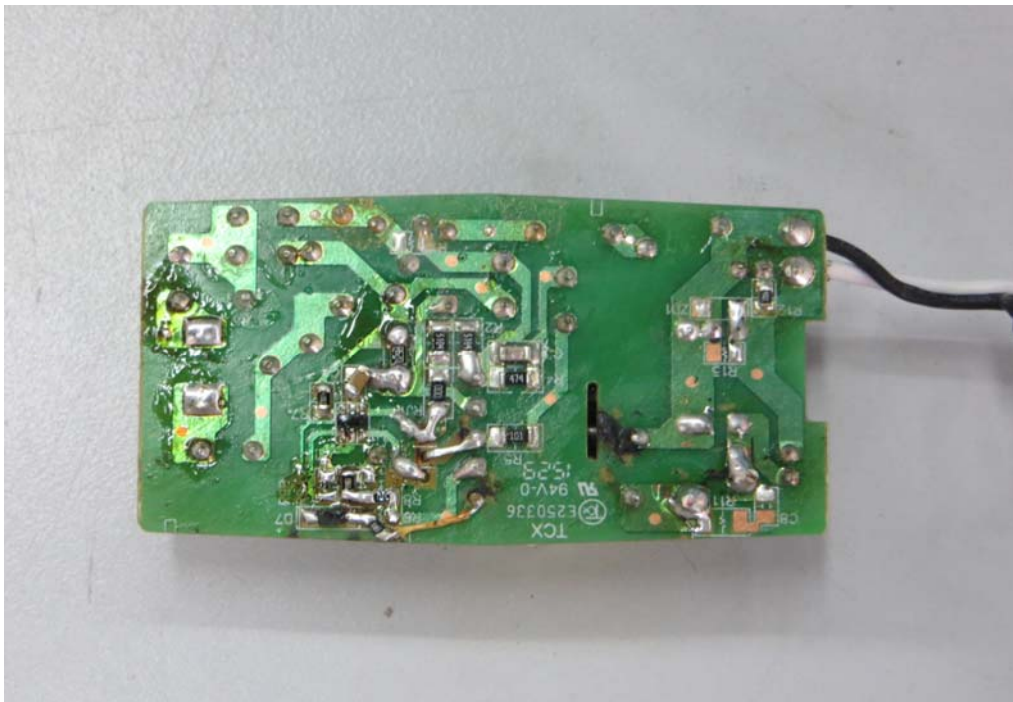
Component side view of PCB of model GT*96060* (Fourth structure)
